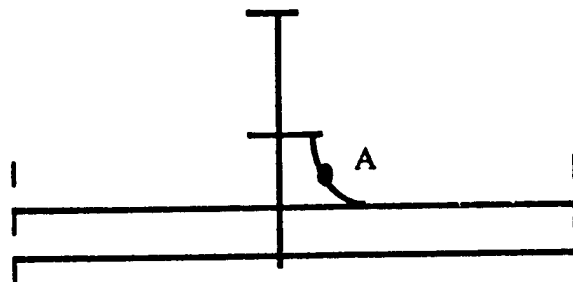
Finite Element Model for Typical Bracket-toe or Stiffener
